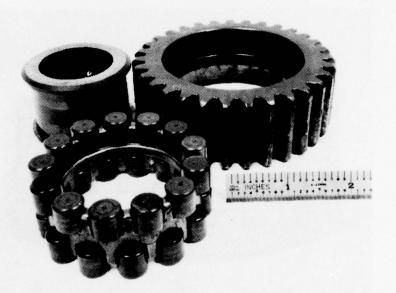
Upper planetary pinion, bearing inner race, rollers, roller guides, and retainer after 25-minute loss-of-lube test of optimized transmission configuration number 1.
